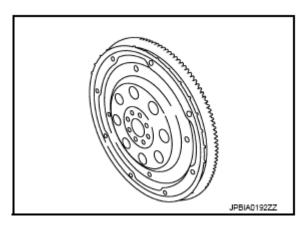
Identifying Drive Plate Courtesy of NISSAN NORTH AMERICA, INC.
